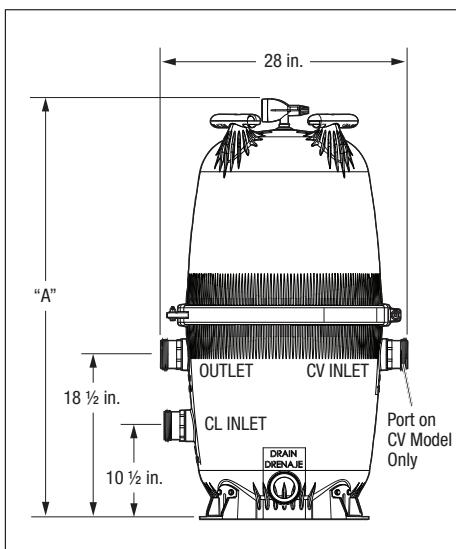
Dimensions, Jandy DEV Series Filter with Jandy NeverLube® Backwash Valve
